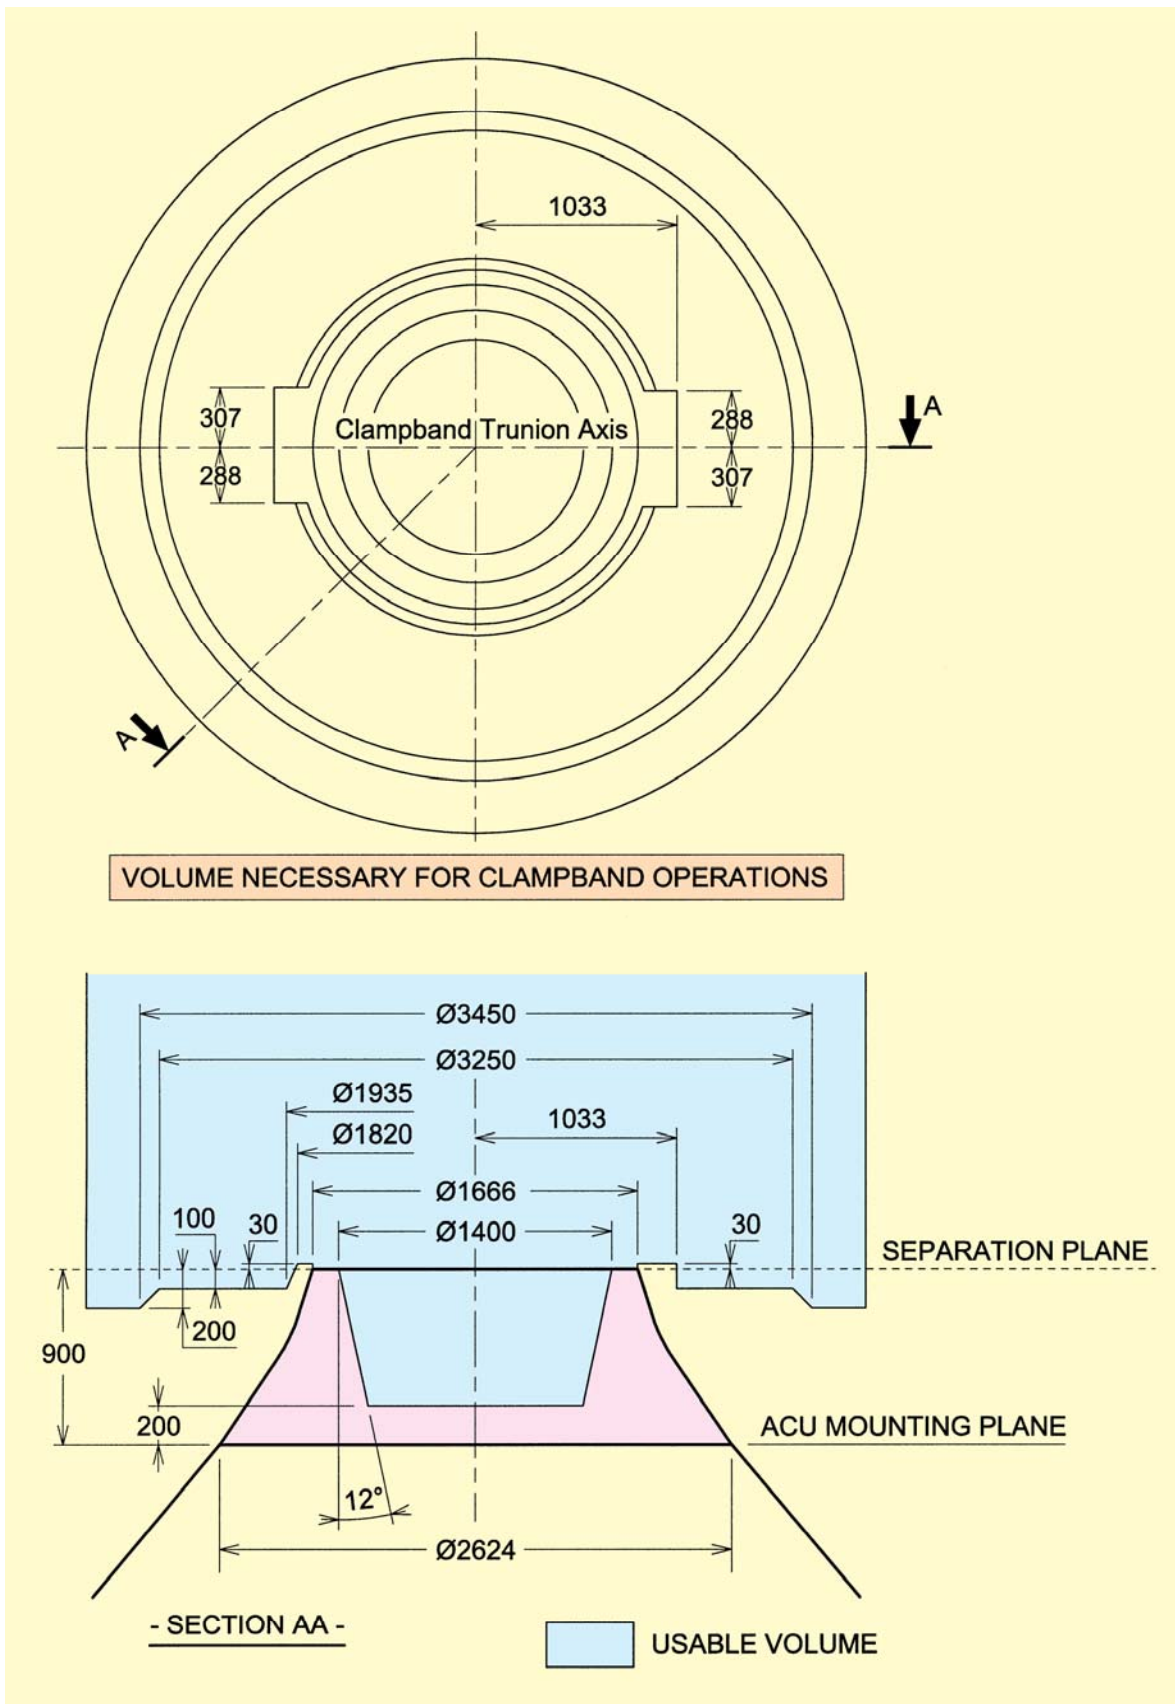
Adaptor 1666V5 – Internal springs version
